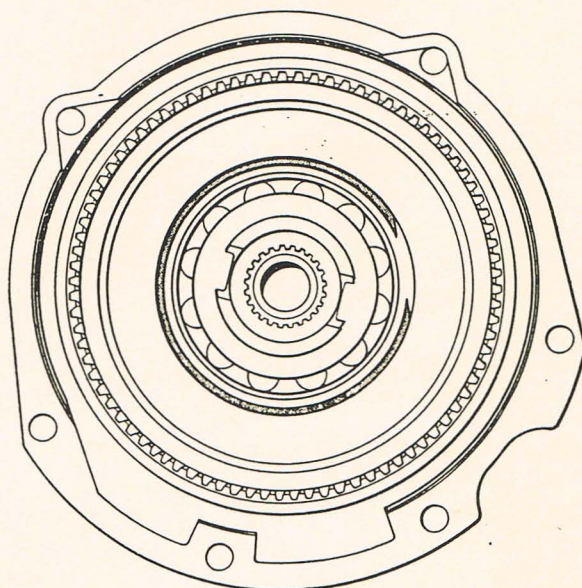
UNI-DIRECTIONAL CLUTCH IN
